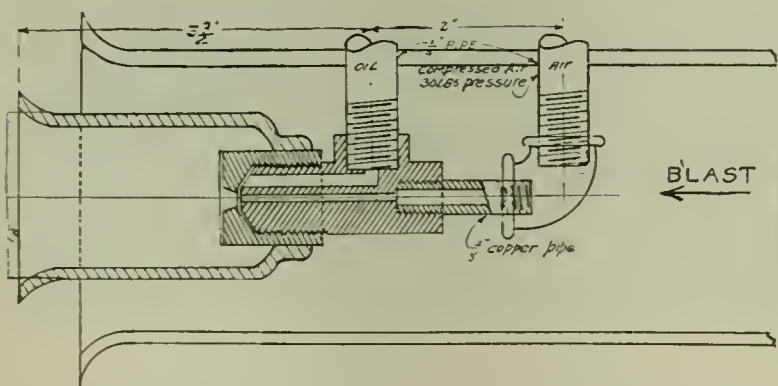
Cross Section of Oil Burner in Annealing Furnace, Using Compressed Air and Blast.
